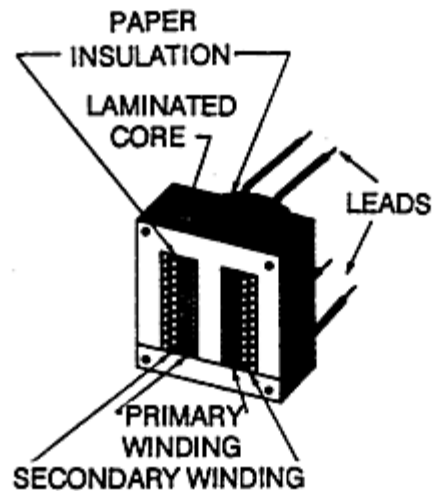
Exploded View of Shell-Type Transformer Construction.
